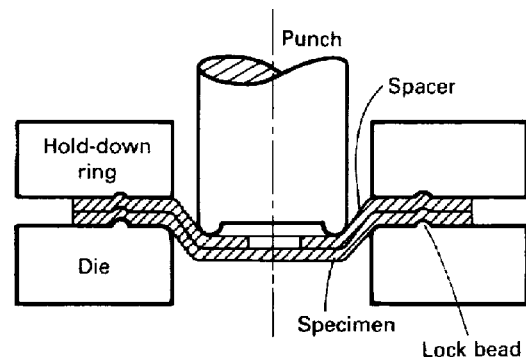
Schematic diagram of Marciniak punch test setup showing both test specimen and spacer sheet [7].
